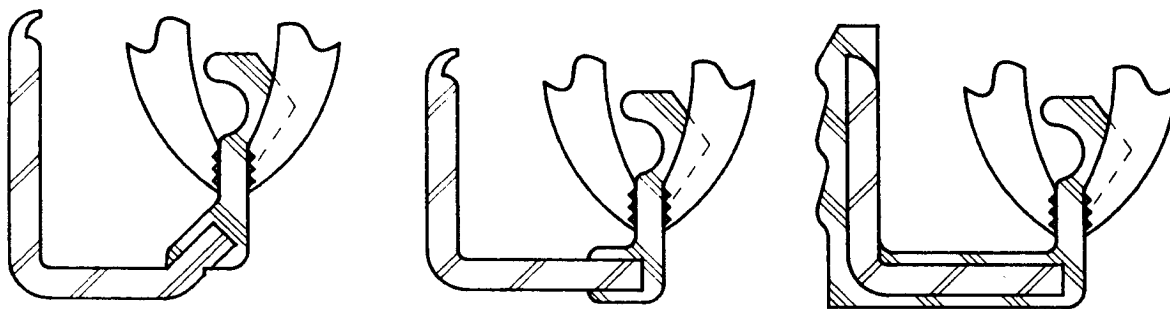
PROPER POSITION OF UPPER FIXTURE JAWS
